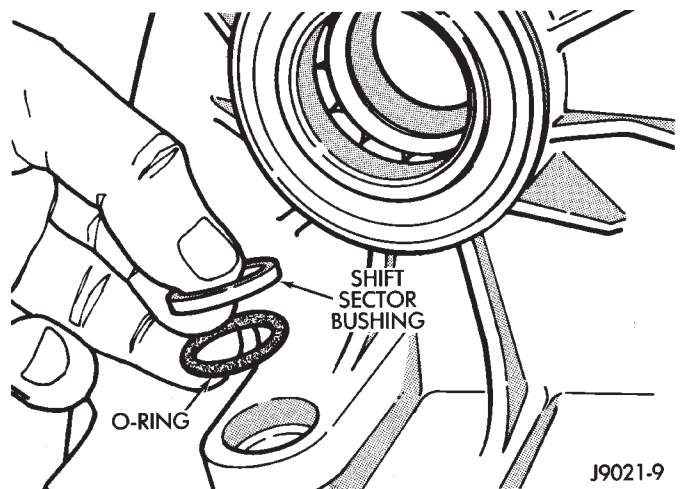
Installing Sector O-Ring And Retainer Bushing
